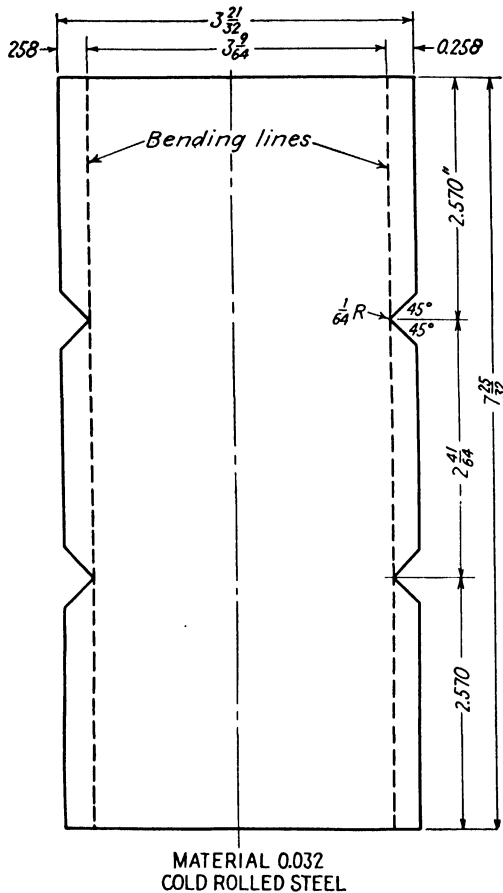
One of the many sizes of steel box blanks possible to produce in the adjustable die shown in the preceding sketch.
